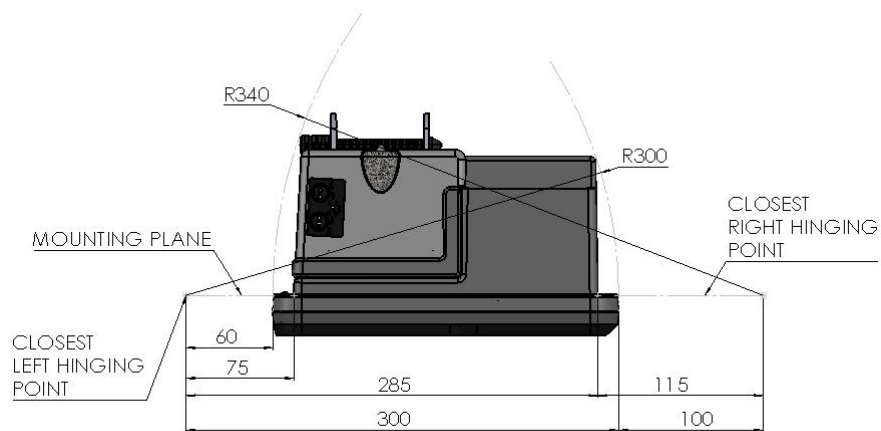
G6-300 Side hinging diagram, spindle pointed left or with no printer.
